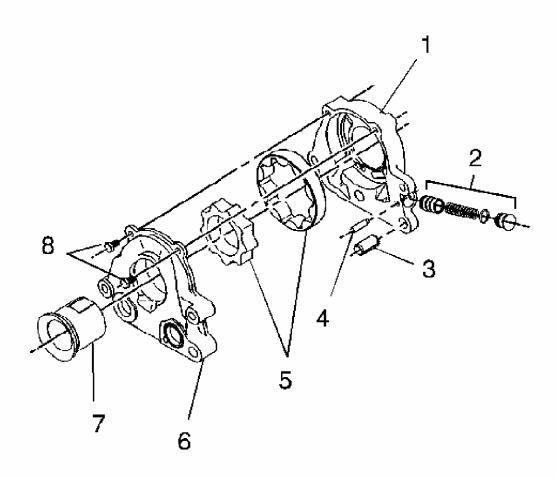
View of Oil Pump Components Courtesy of GENERAL MOTORS CORP.
